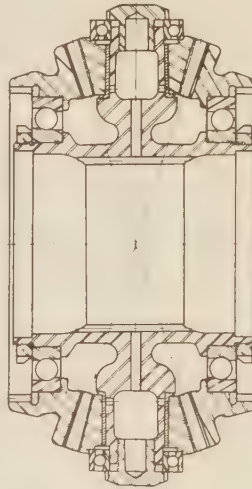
PLANETARY BEVEL GEARS, 90 DEG SHAFT ANGLE
